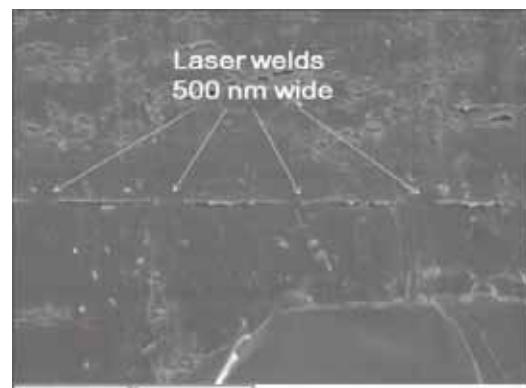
Laser welded sample showing 0.5 μ m wide welds (48W, 3000mm/min).
